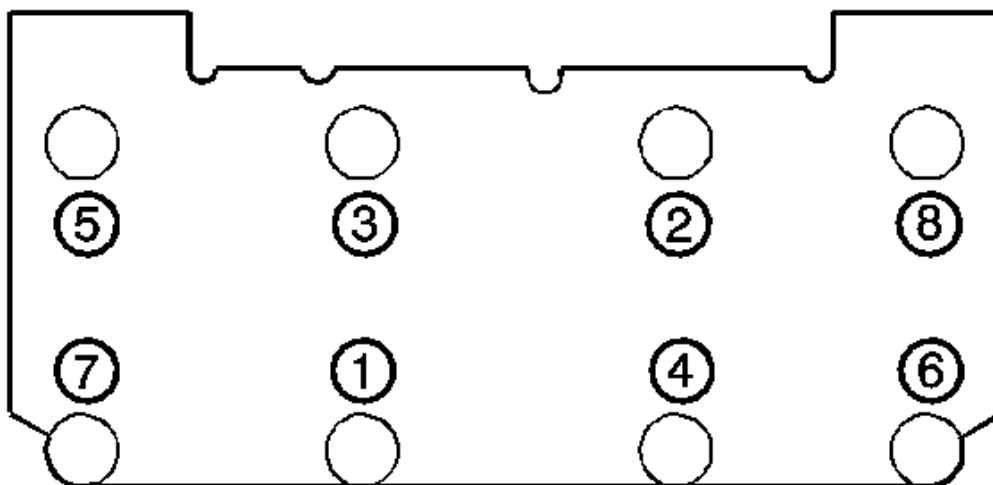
Identifying Cylinder Head Bolt Tightening Sequence
